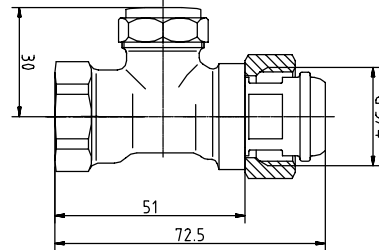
Straight with 1/2" internal to 3/4" internal thread
